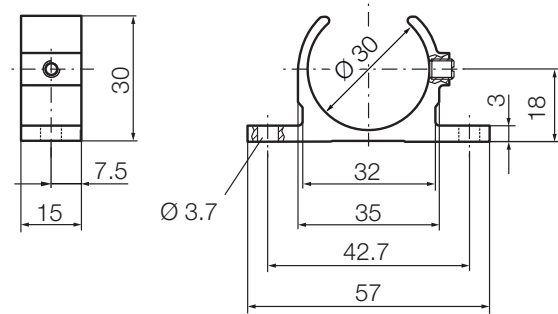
BTL6-A-MF01-A-43 mounting clamp
